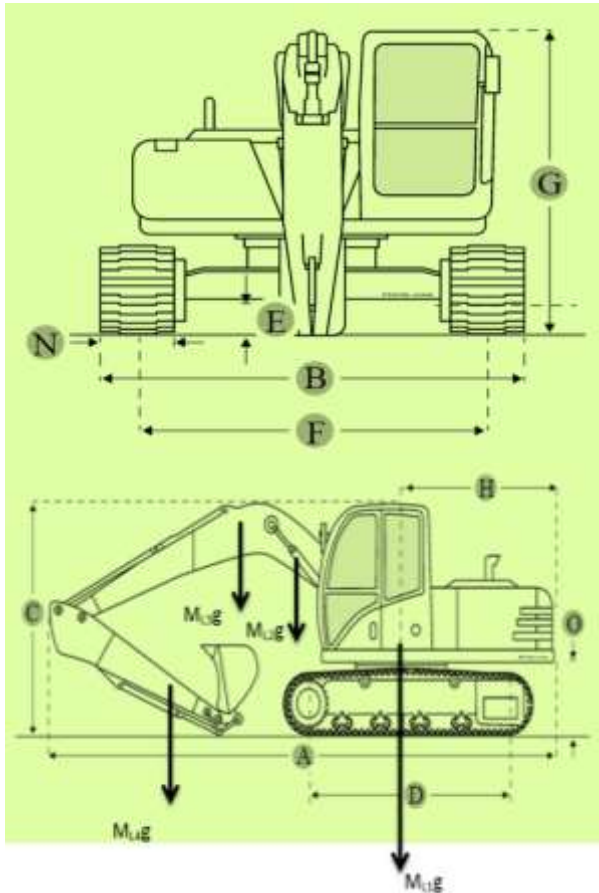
Specific dimensions and center of mass of parts of CAT390DL hydraulic excavator.
